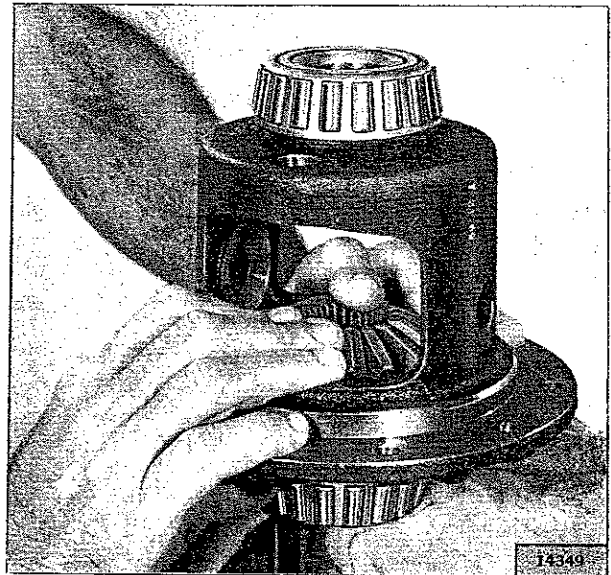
INSTALL DIFFERENTIAL CASE ON AXLE SHAFT
